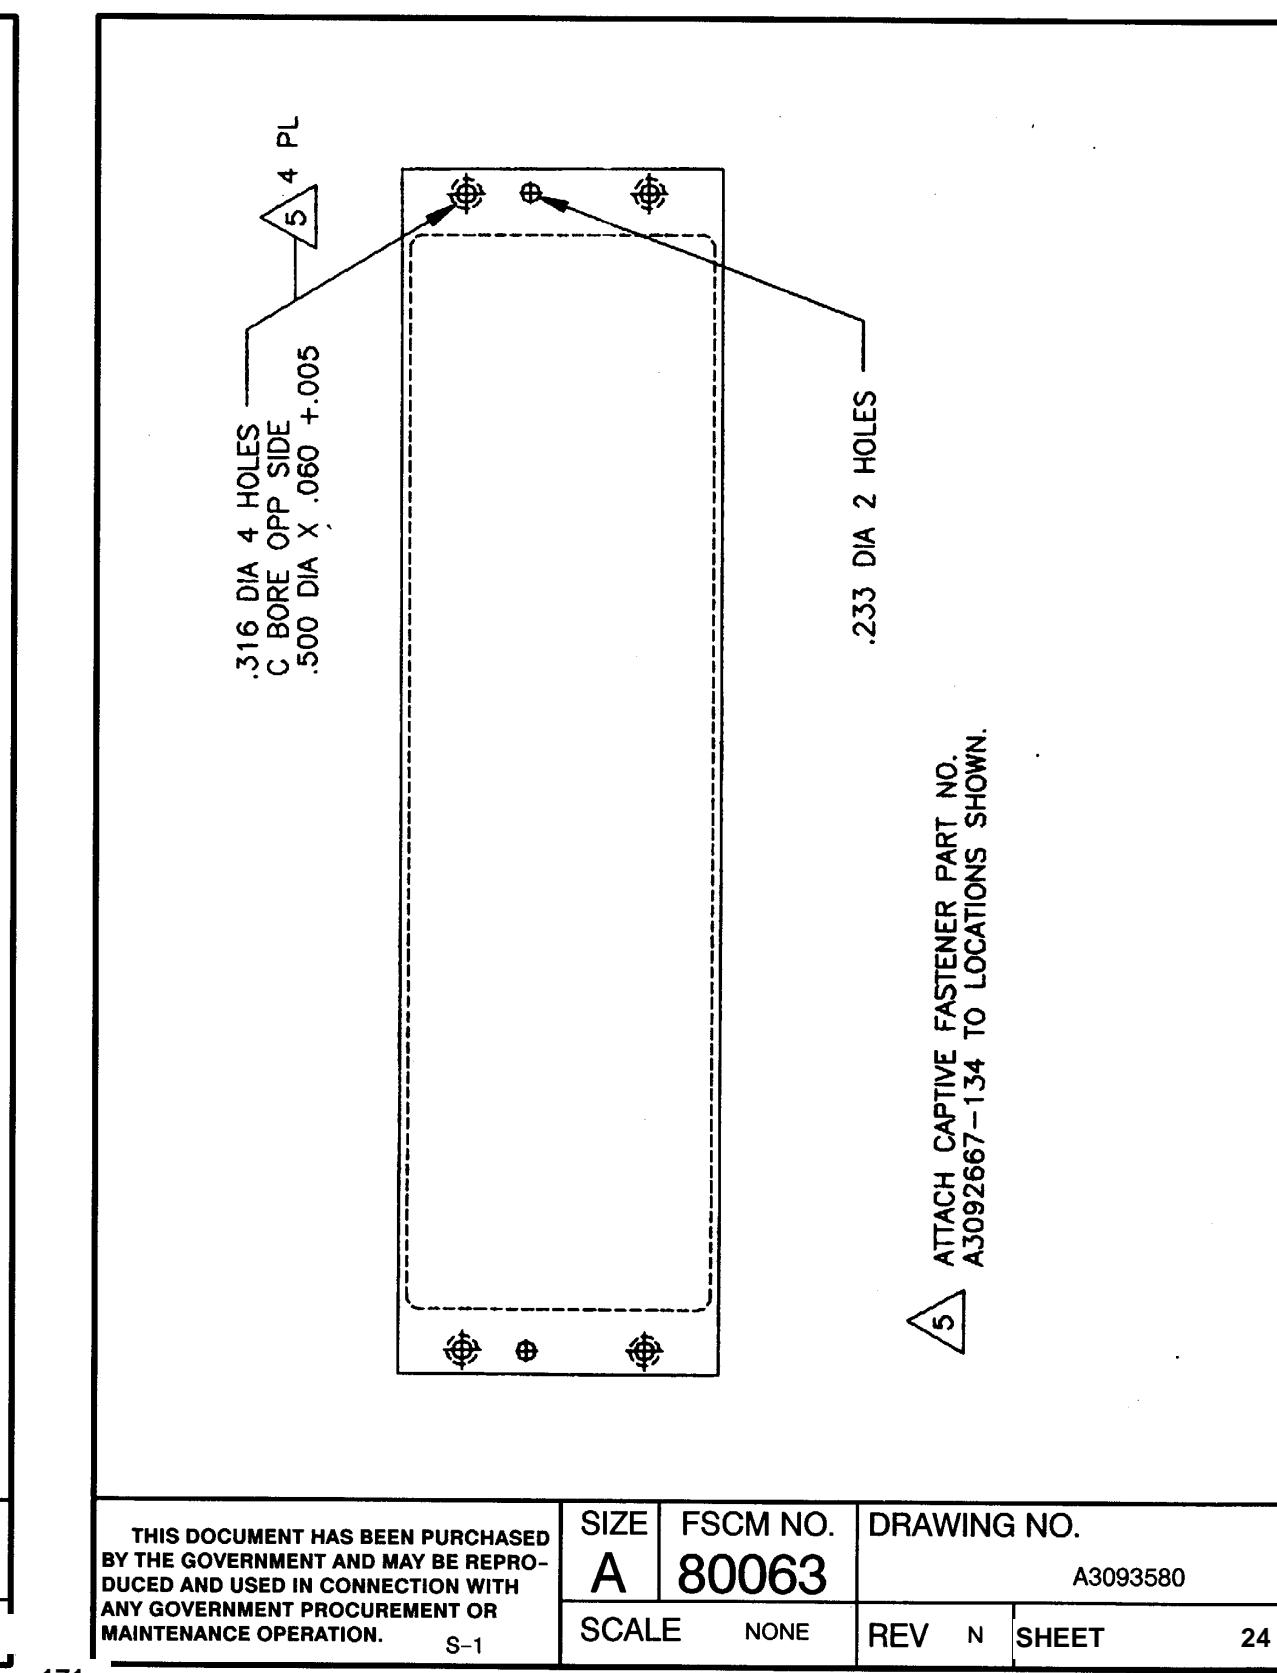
INVERTER ASSEMBLY (-3), PANEL/CHASSIS
